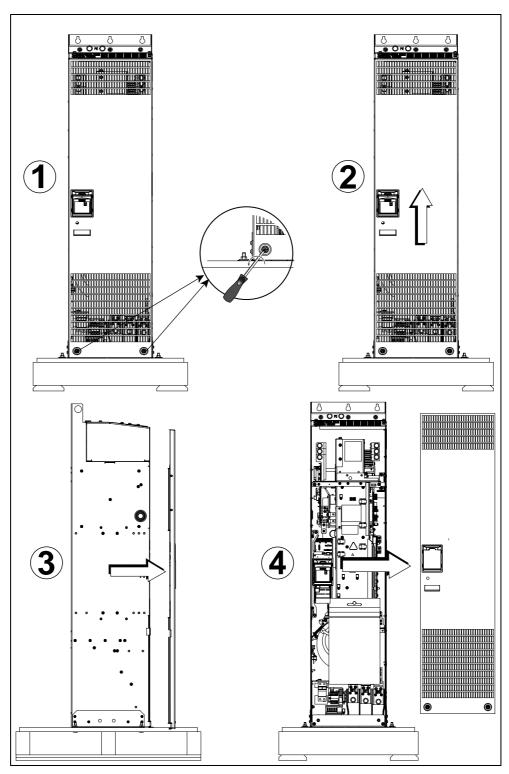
Removing front covers (Frame Sizes FX and GX)
